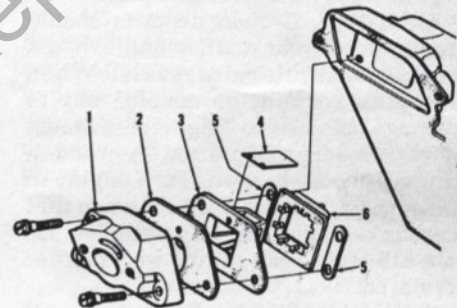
View showing reed valve and spacer installation used later in production than parts shown in Fig. HL2, but prior to installation shown in Fig. HL1.
